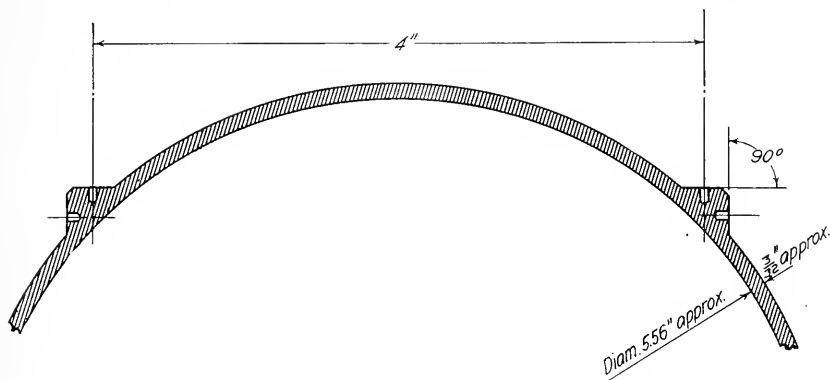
ARRANGEMENT OF GAGE HOLES ON TUBES.
